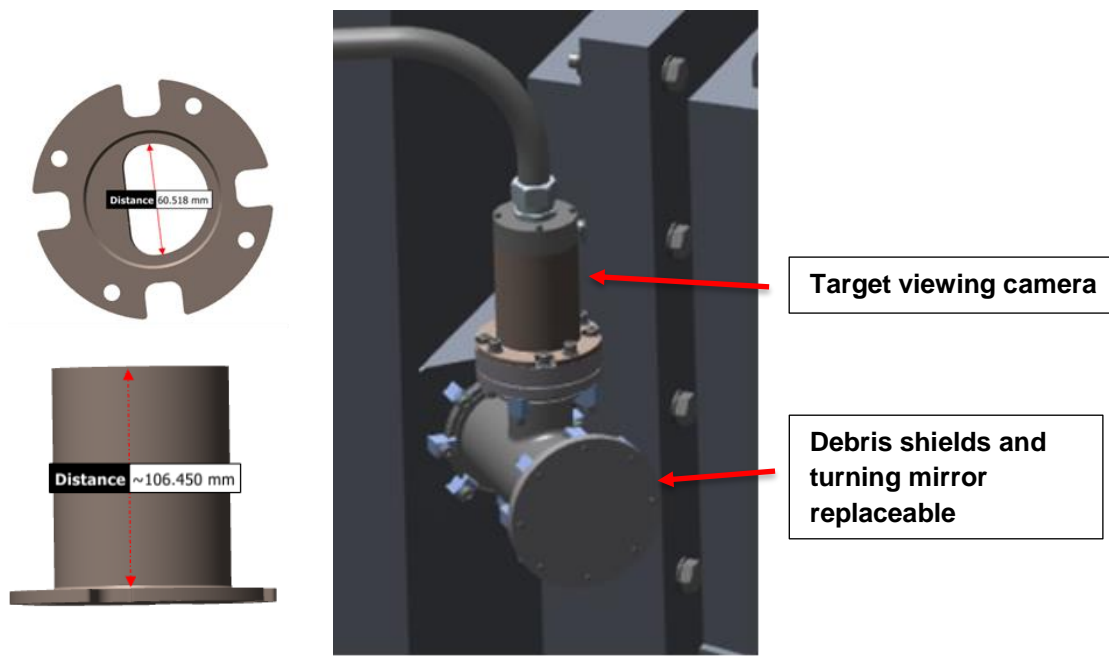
Details of target viewing camera with in-situ debris shield and turning mirror assembly.
